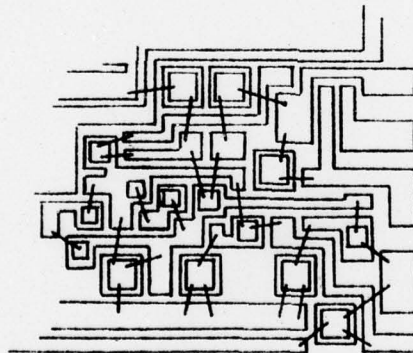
EXAMPLE OF A LINE DRAWING FOR A HYBRID ASSEMBLY
